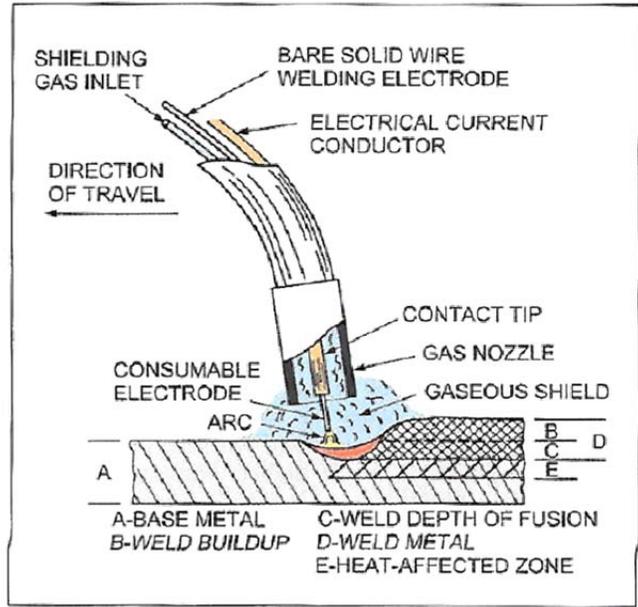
Schematic Representation of Gas Metal Arc Welding.
